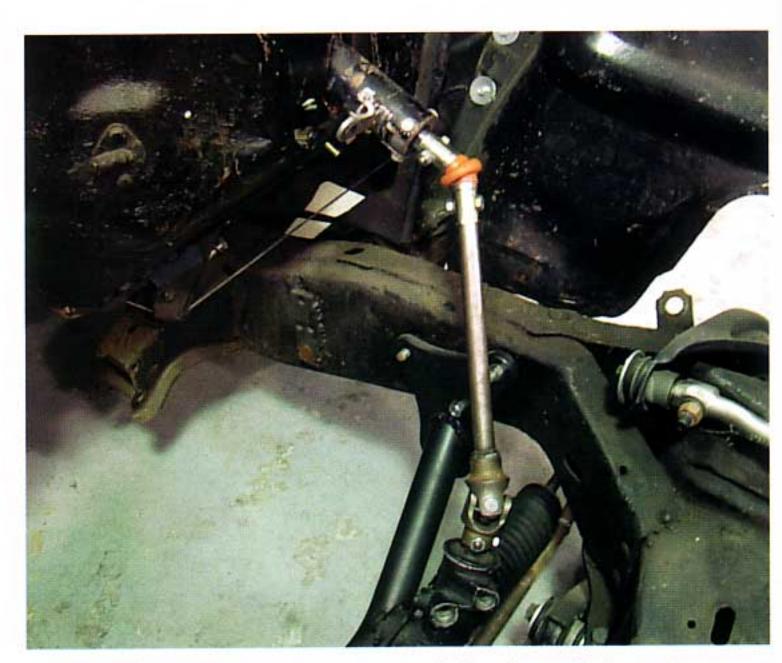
The original coupler shaft for the rack & pinion consisted of an upper and lower U-joint that coupled the original steering shaft, cut from the stock steering box, with the rack and pinion. This works well, but by cutting the stock shaft from the steering box the old box became junk. Good rebuildable steering boxes are getting harder and harder to find and are quite valuable to someone restoring an original car.
